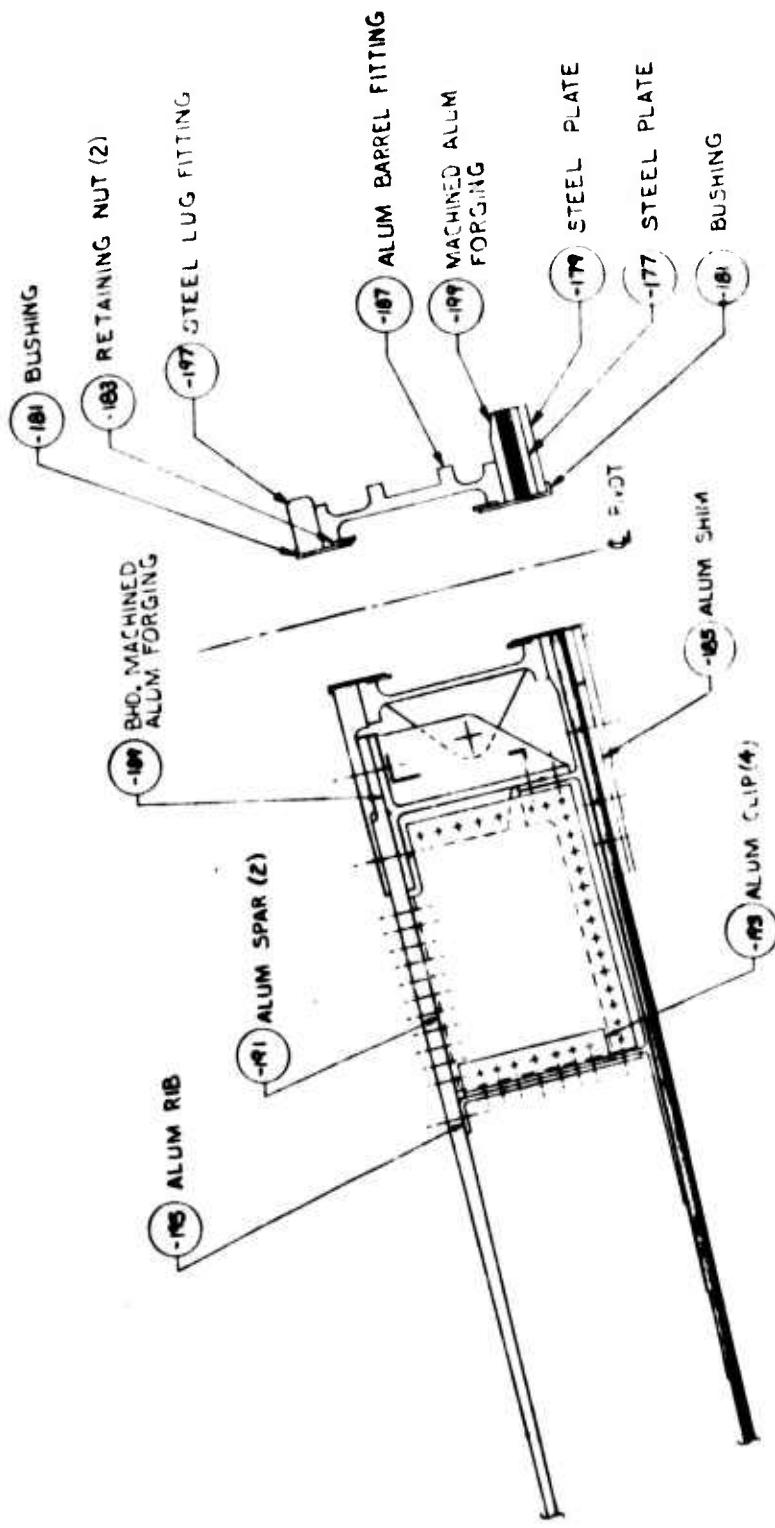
633RW002-3 Pivot Fitting (Sheet 2 of 2)
